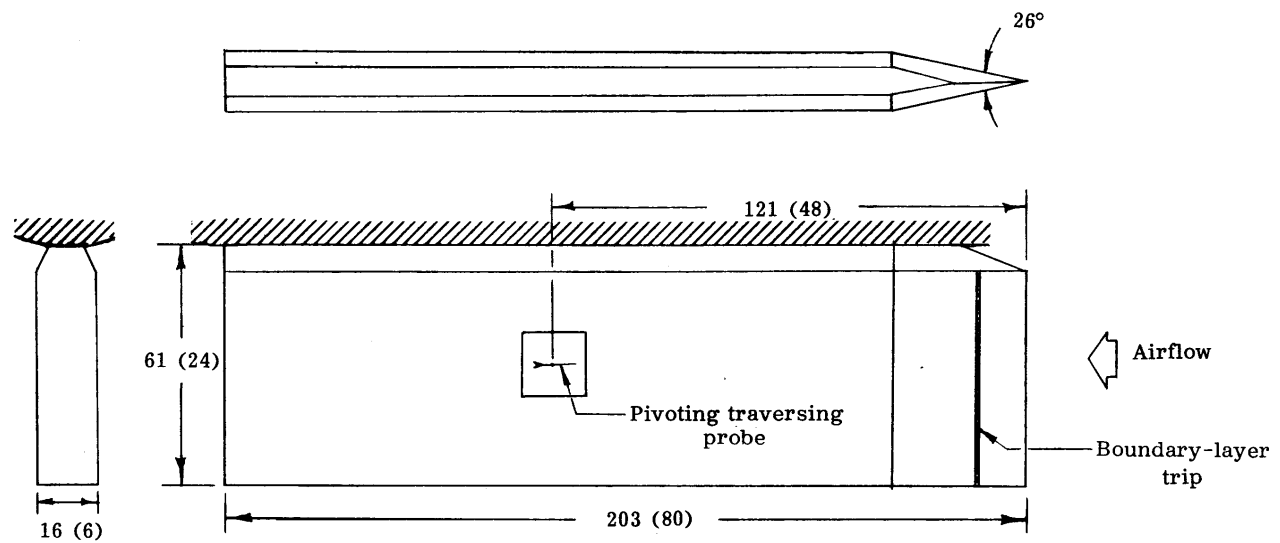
Three-view sketch of the flight-test fixture. Dimensions in centimeters (inches) unless otherwise indicated.
